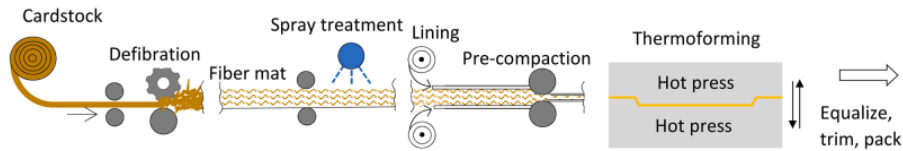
Dry thermoforming molding processing technique (Semple et al., 2022)
